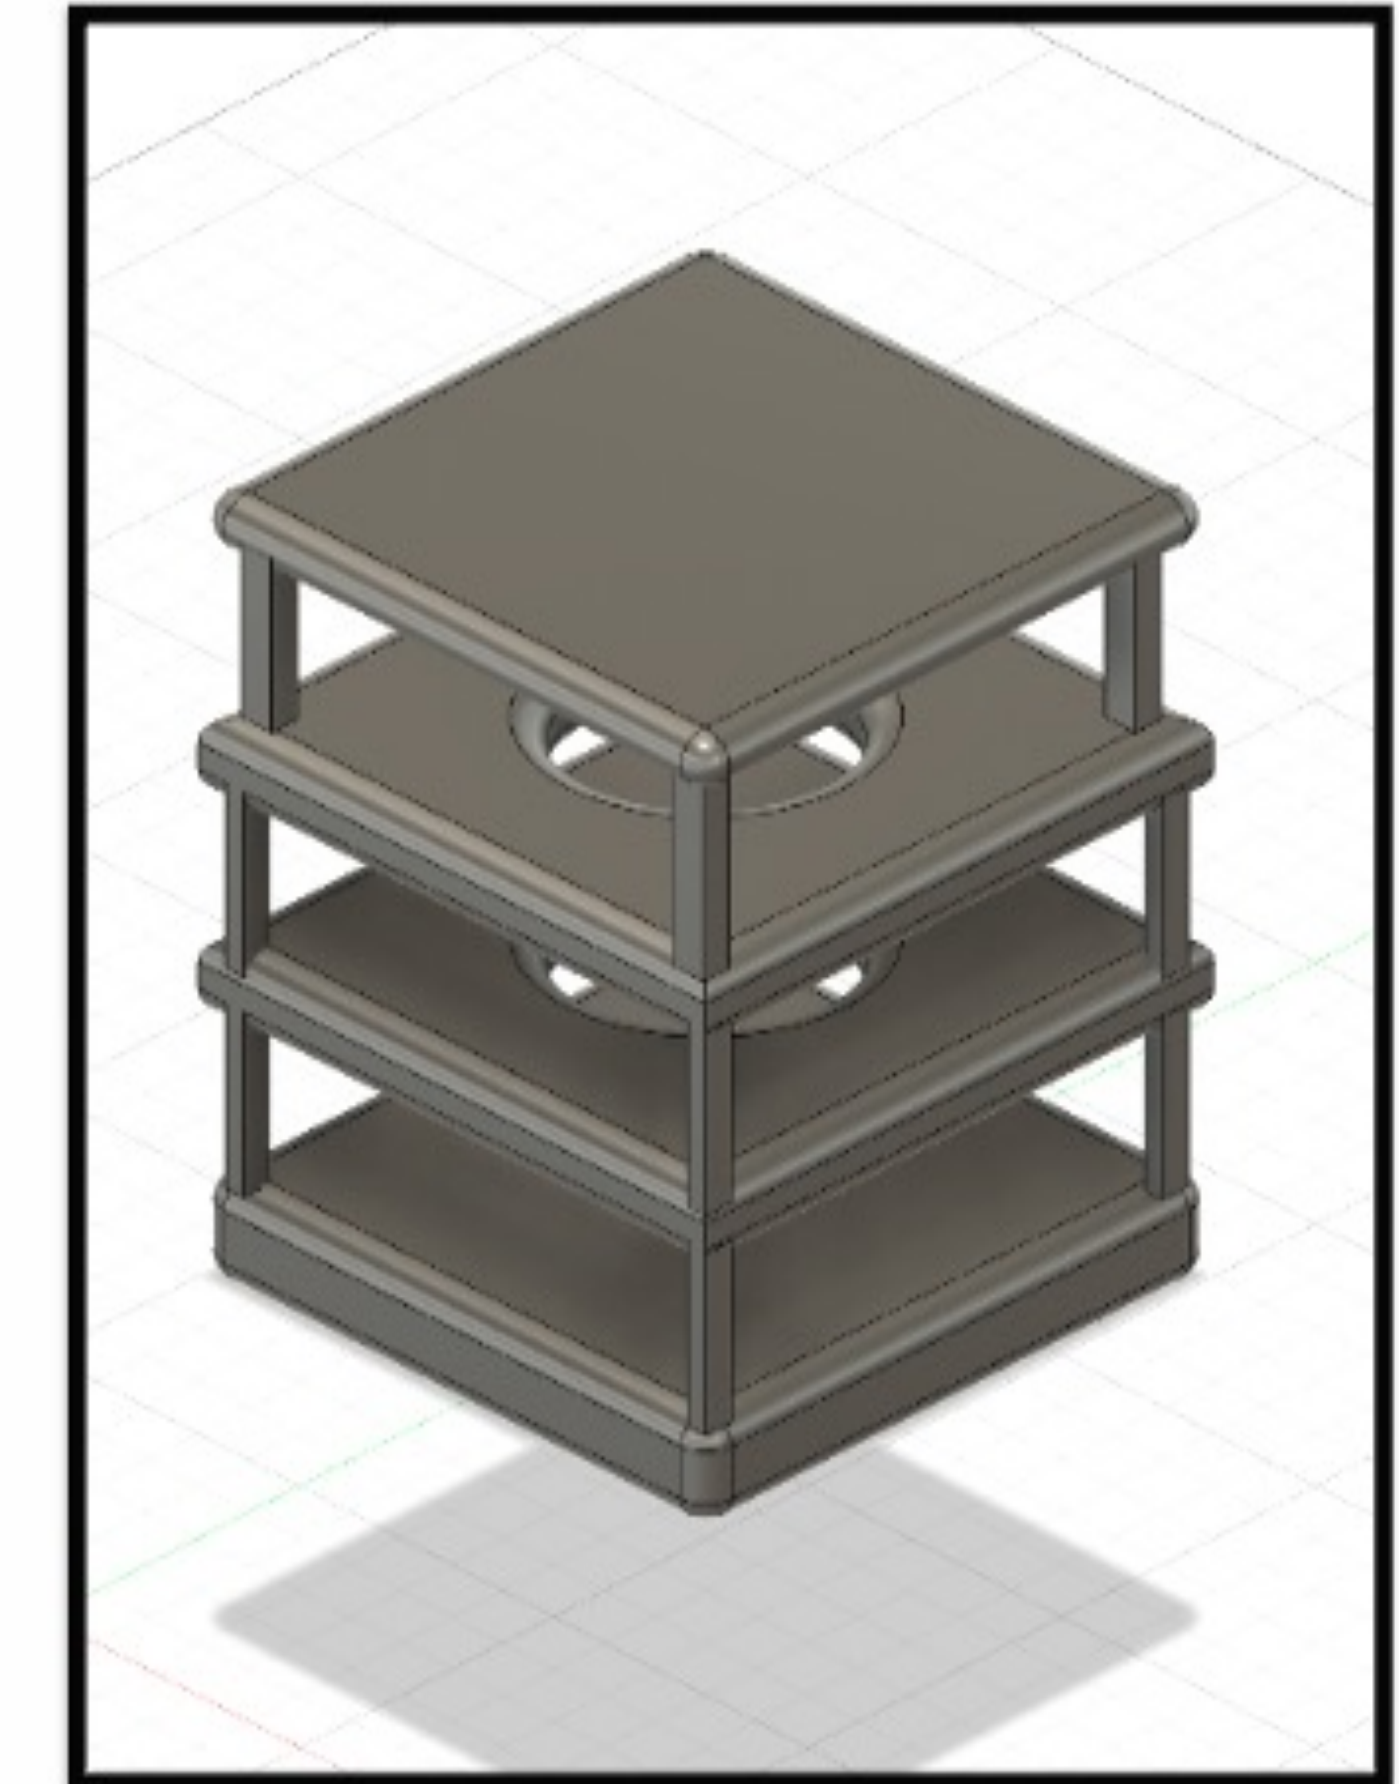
Base of the new design in Fusion 360, model base to be printed (top right)
